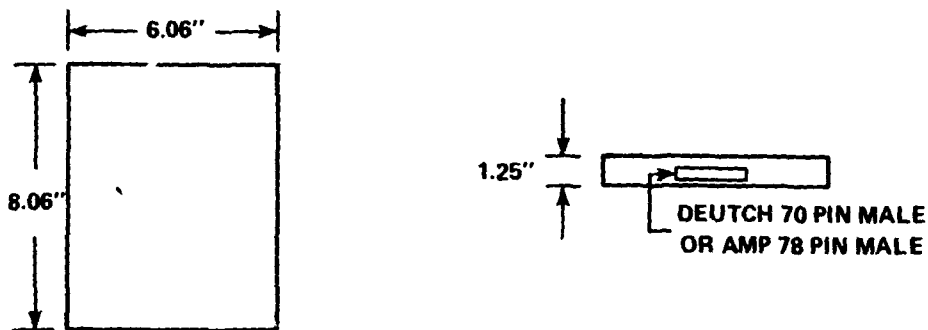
Data Processing Unit Power Supply Outside Dimensions
